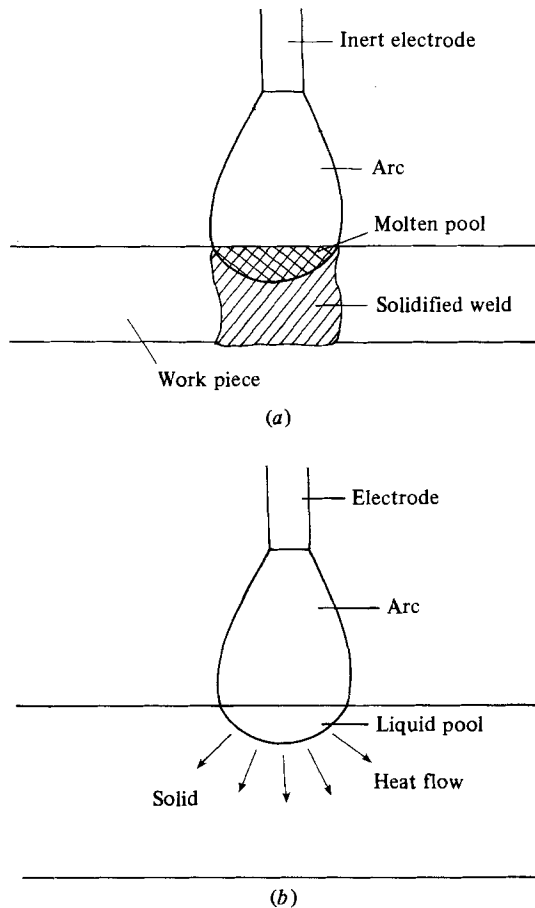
(a) Sketch of the TIG welding system. (b) Idealized representation of the welding process.
